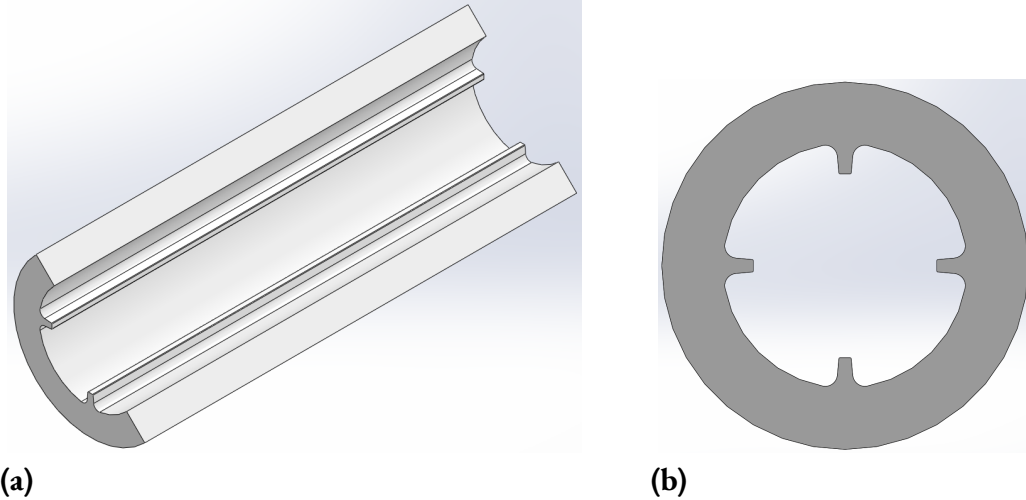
RTRA 200 side cut view (a) and cross-sectional view (b).
